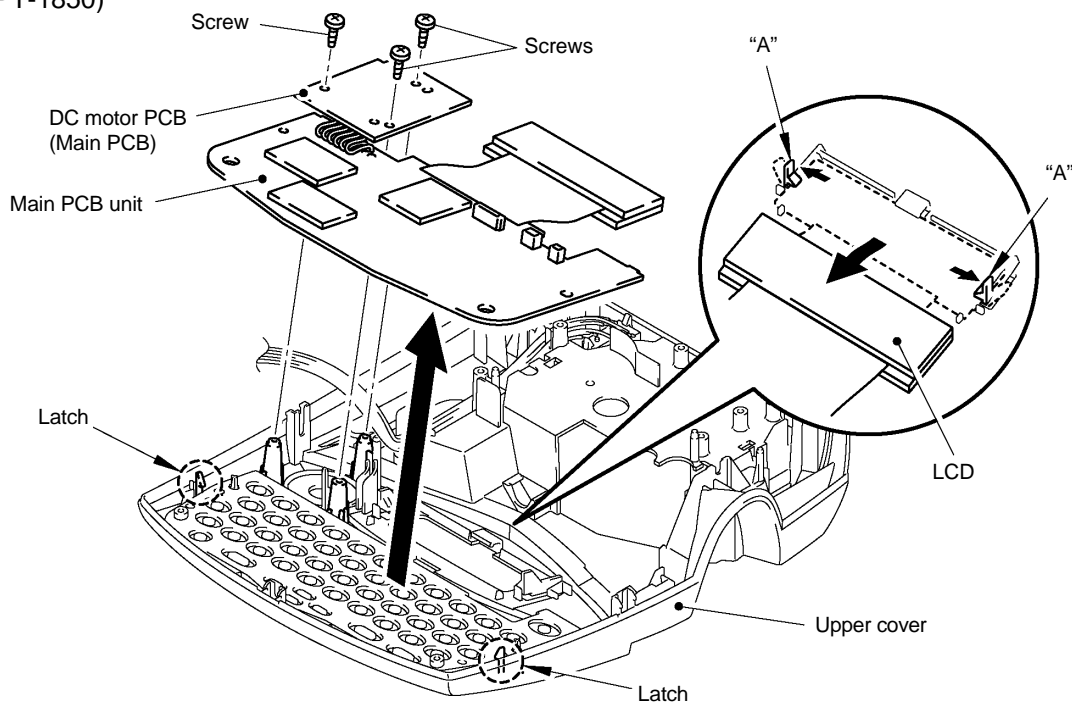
Removing the Main PCB Unit and DC Motor PCB (1)
